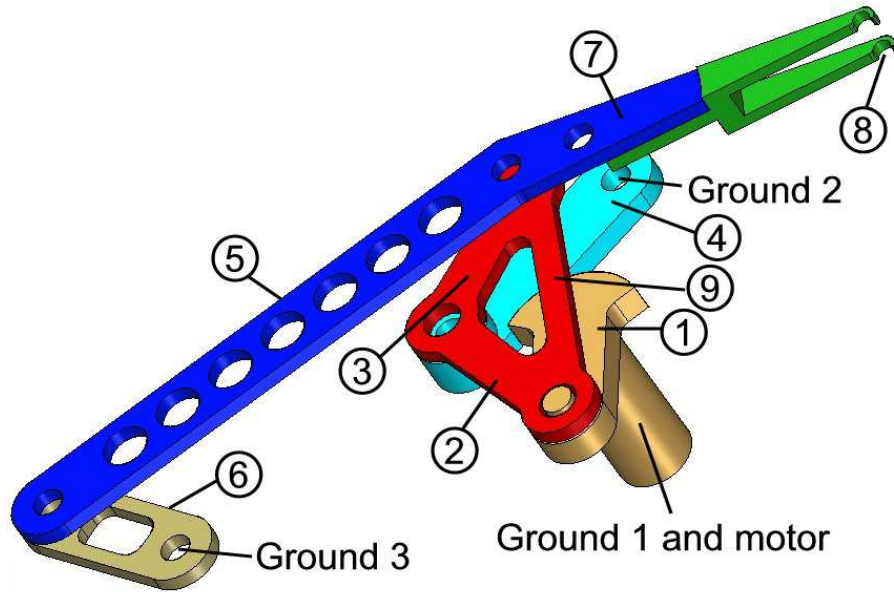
A CAD drawing of the Woodpecker mechanism
